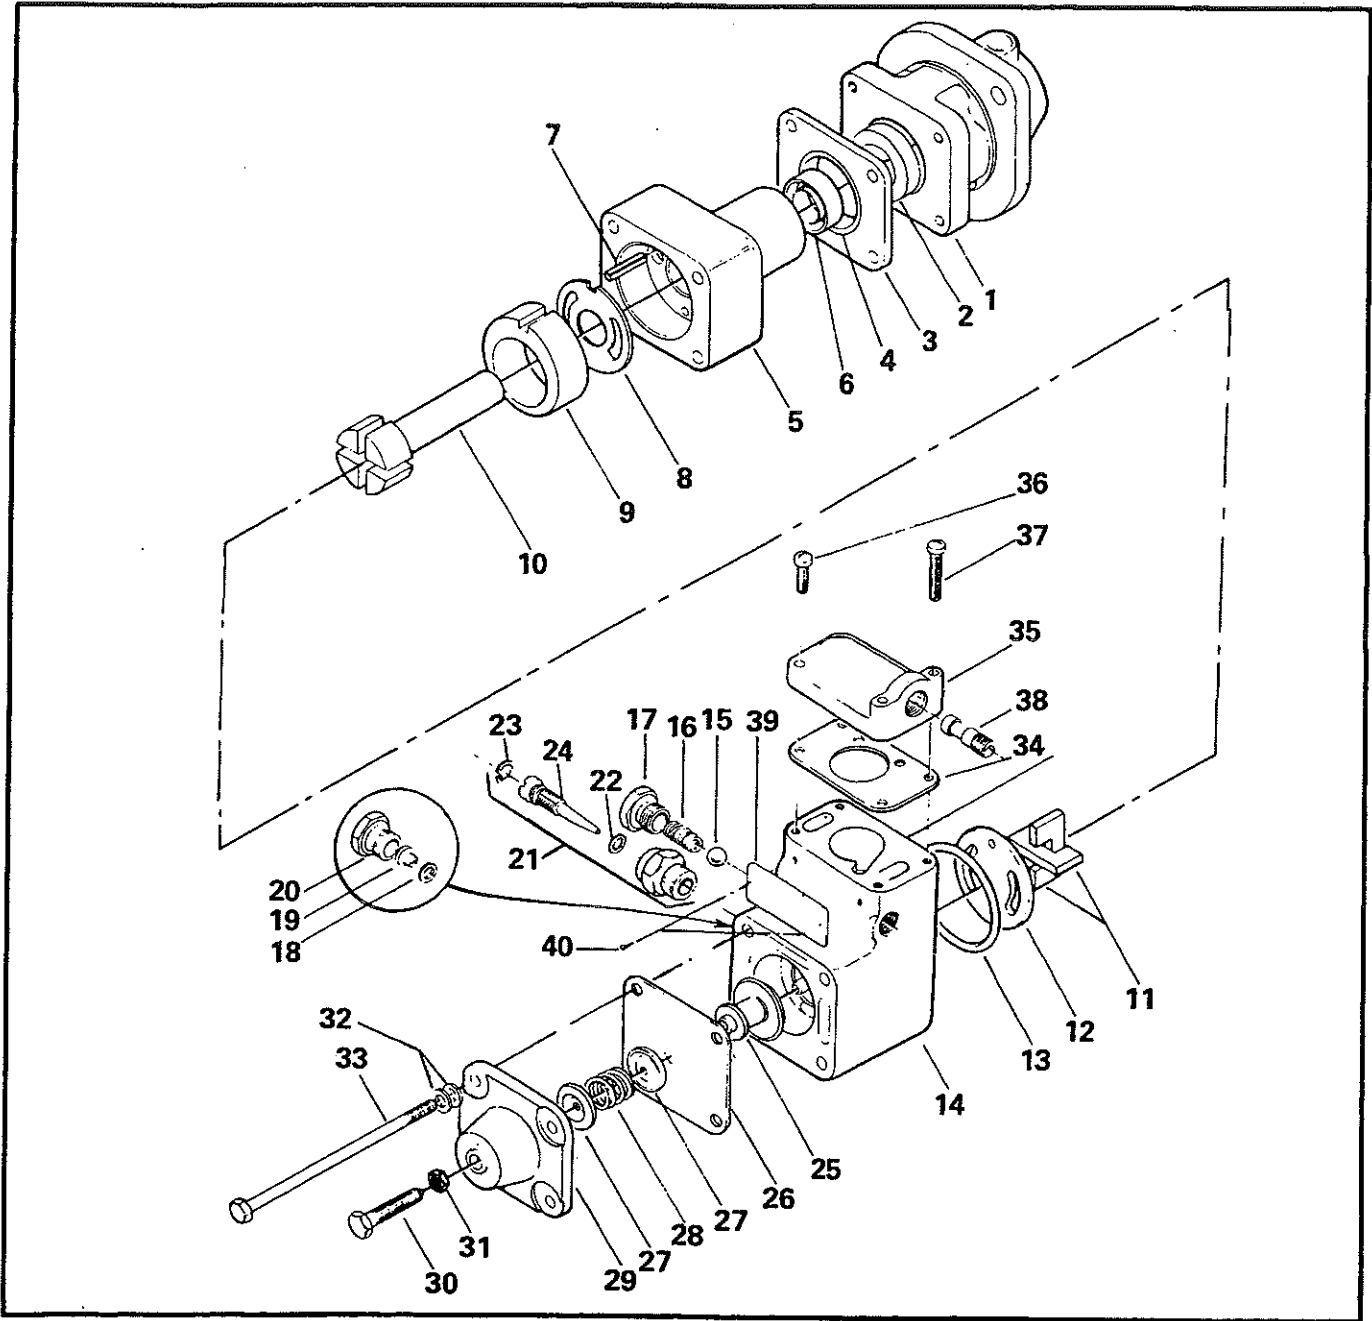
FUEL PUMP ASSEMBLY.
